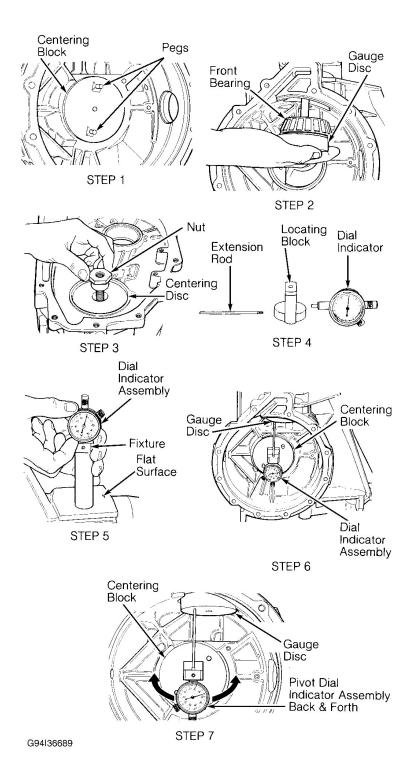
Checking Transfer Shaft Depth (Step 2) Courtesy of CHRYSLER LLC
